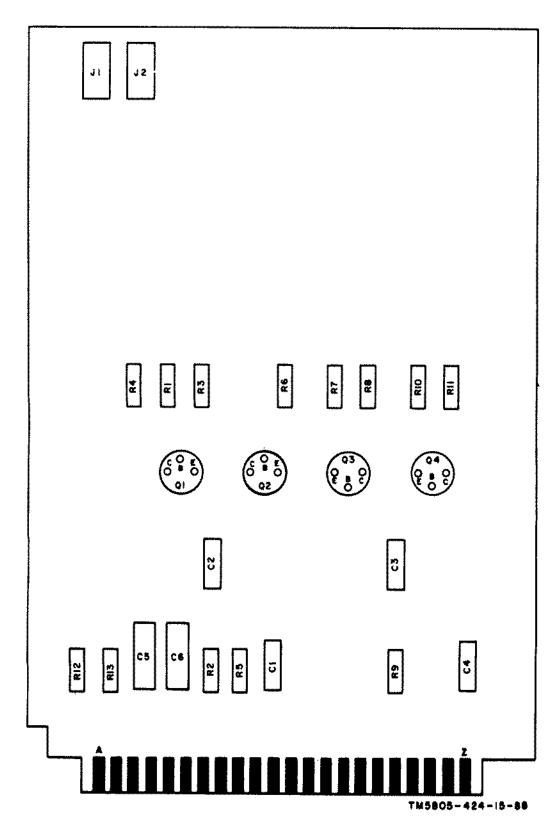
Printed-circuit card assembly A25A3 (PC 80034230), component location diagram.
